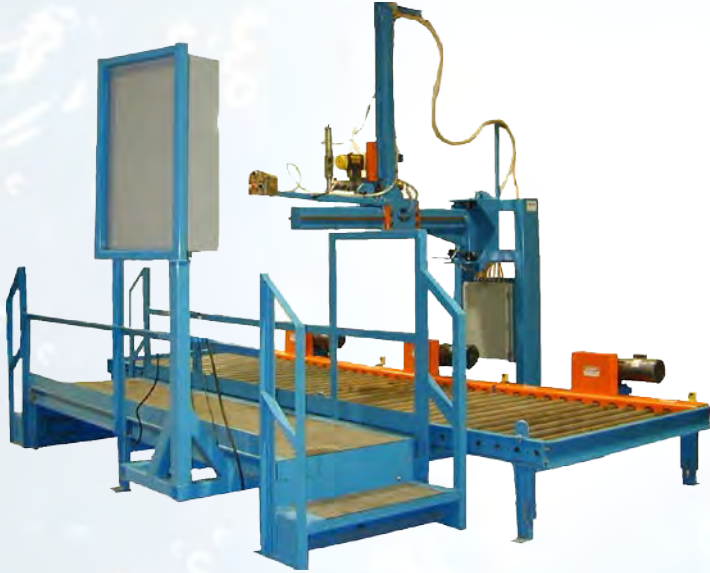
This recirculating system was created to add to the filler machine when filling high-foam liquids. It reduces foaming by as much as 50%, making it possible to double production rates. The package includes; a special lance and ball valves for the filler, a special pump, flow meter, couplings, hoses and fittings, and programming with NEMA 4 controls.
